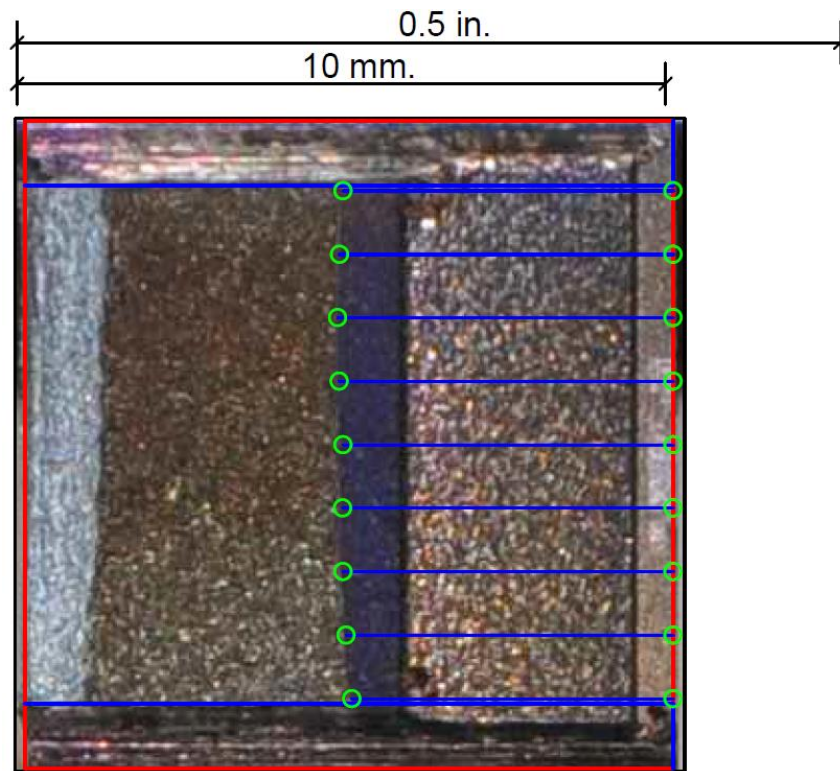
Specimen F28' Fracture Surface
